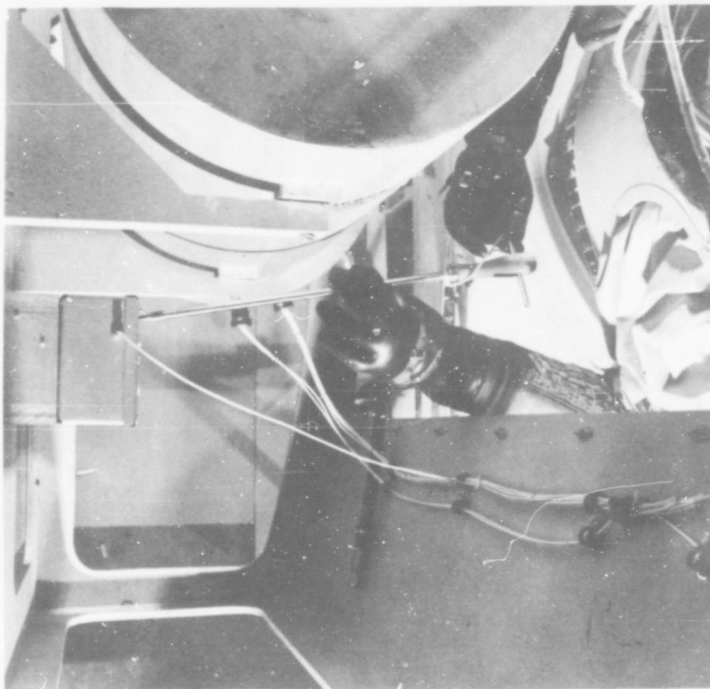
MODIFIED SCREW DRIVER FOR SWITCH REPLACEMENT
